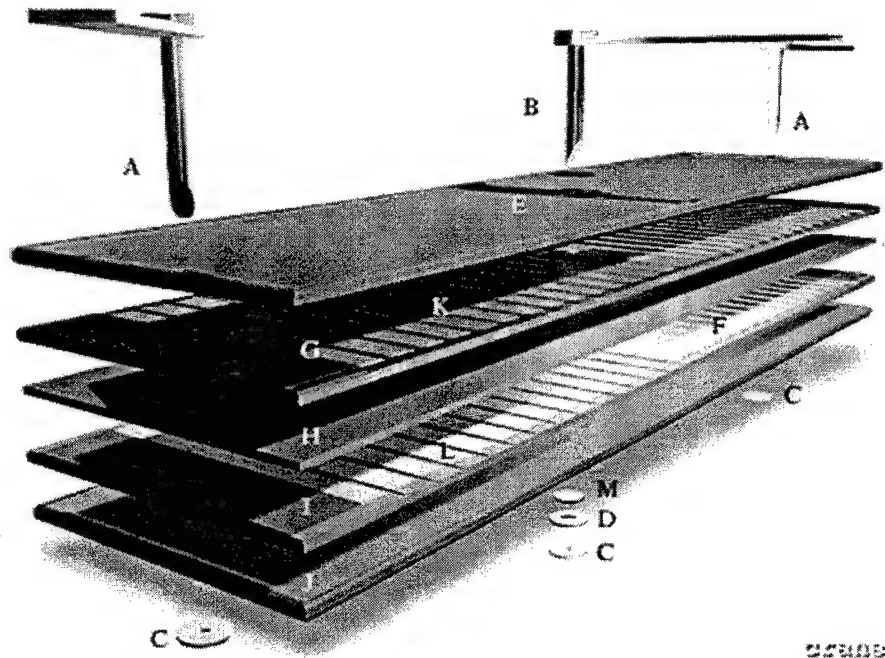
Exploded view of Hockaday MicroFuel Cell™. Components include (A) Air Electrode Contact Rivet, (B) Fuel Needle, (C) Rivet Fold Out, (D) Upper Gasket Ring, (E) Lower Gasket Ring, (F) Through Contacts, (G) First Set of Fuel Cells, (H) Fuel Manifold, (I) Second Set of Fuel Cells, (J) Air Manifold, (K) Air Electrodes, (L) Fuel Electrodes, and (M) Contact Washer. Source: <http://www.mhtx.com/>.
